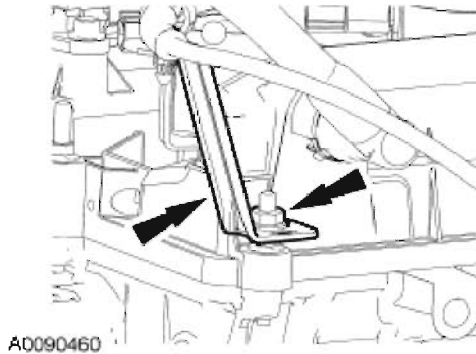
Identifying Accelerator Cable Bracket Bolts
